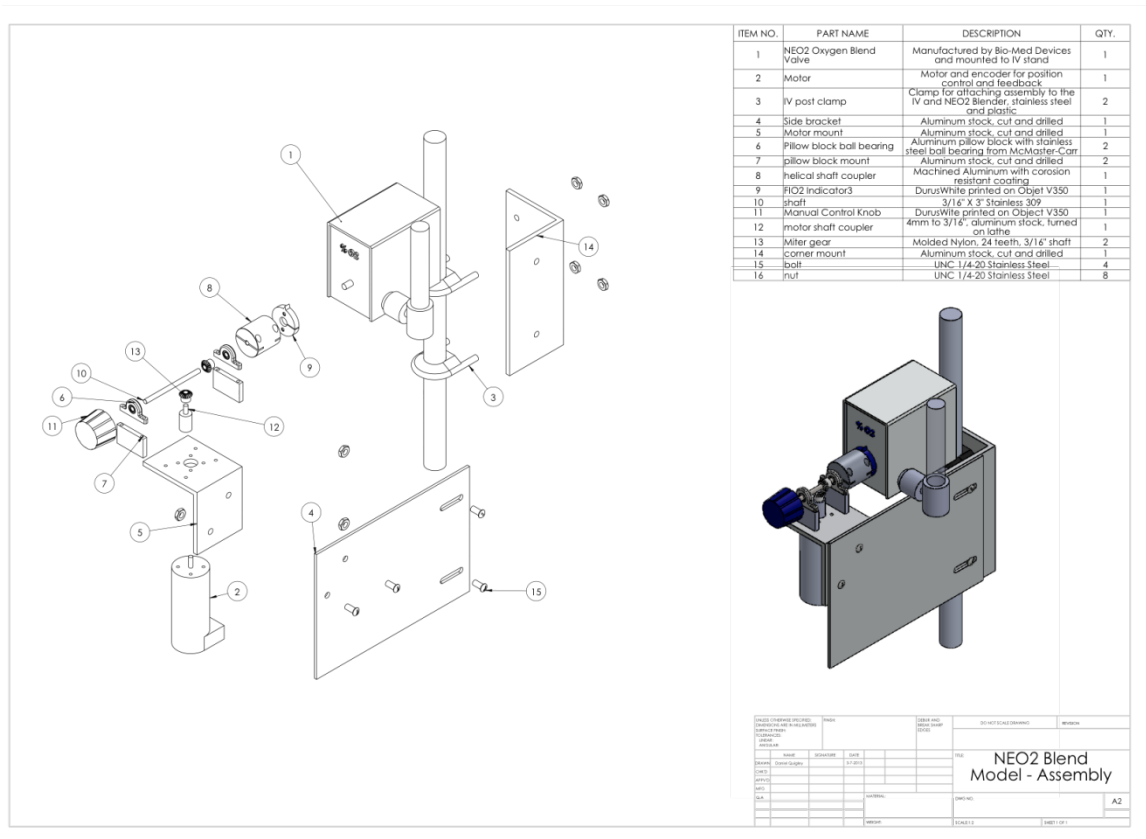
NEO2 Blend valve retrofit design assembly drawing.
